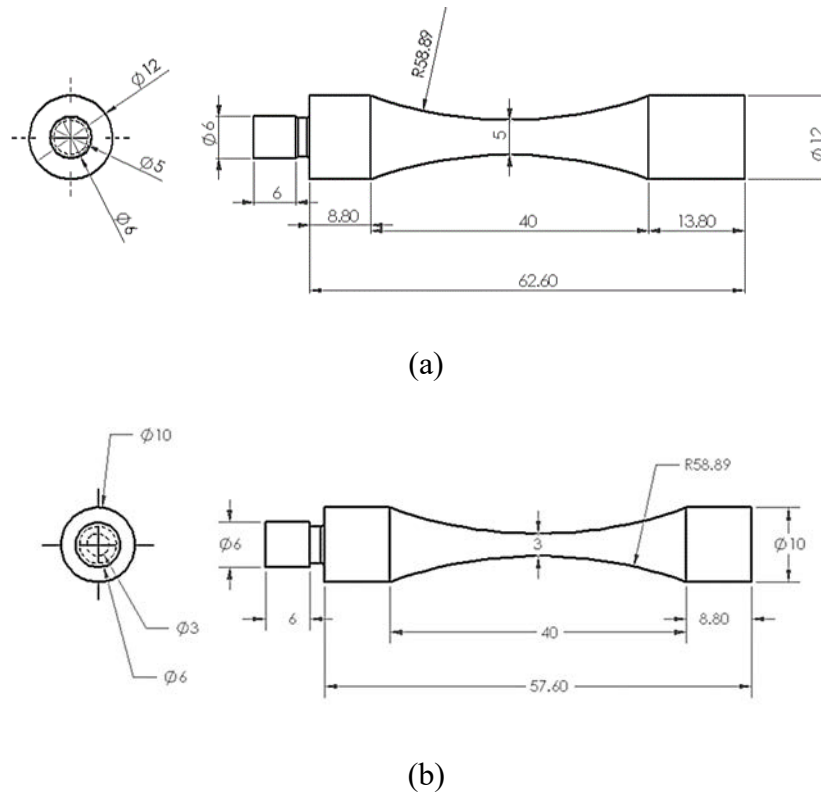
Dimensions and geometries of USF fatigue specimens used in this study. The drawing in (a) is for oversized specimens that were post-process machined for enhanced surface quality. The drawing in (b) represents the net shape specimen dimensions.
